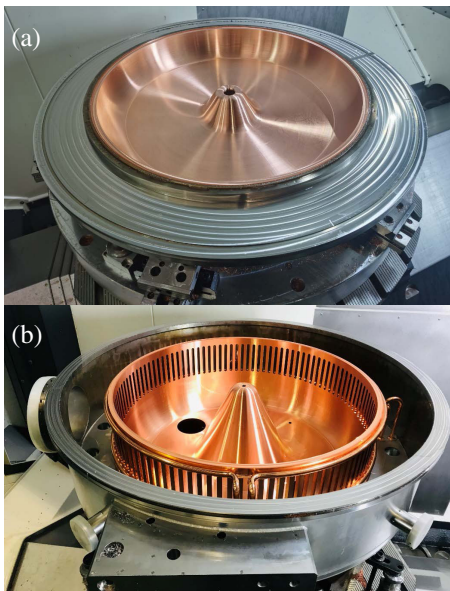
The anode assembly (a) and cathode assembly (b) after final machining.
